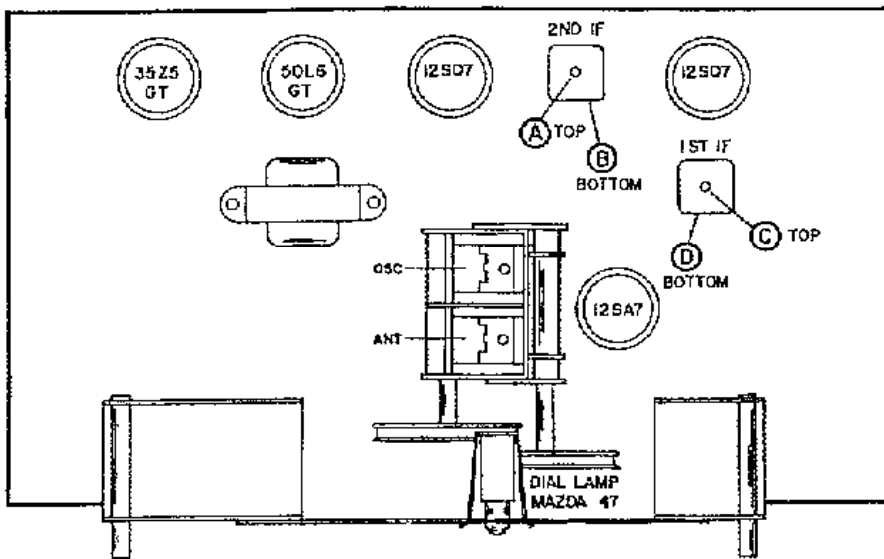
Top View of Chassis Showing Location of Alignment Adjustments, Tubes and Dial Lamp
